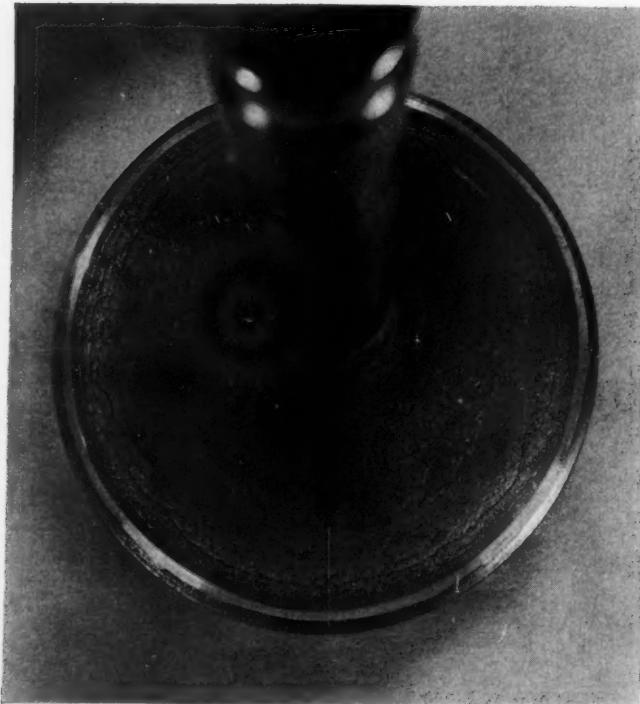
This valve if used with solid insert under the test conditions would show evidence of leakage
